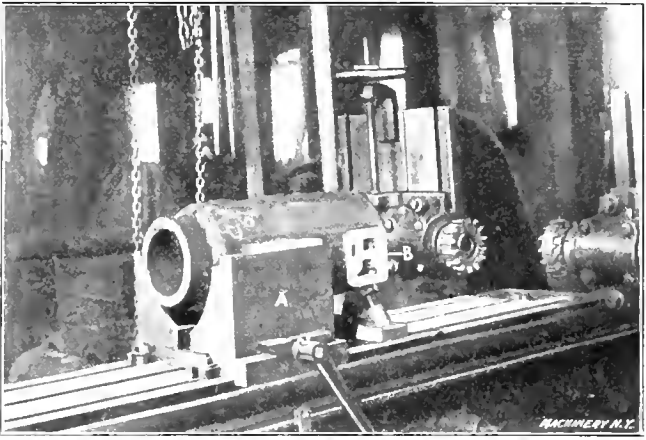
Surfacing Inlet and Exhaust Box Pads
